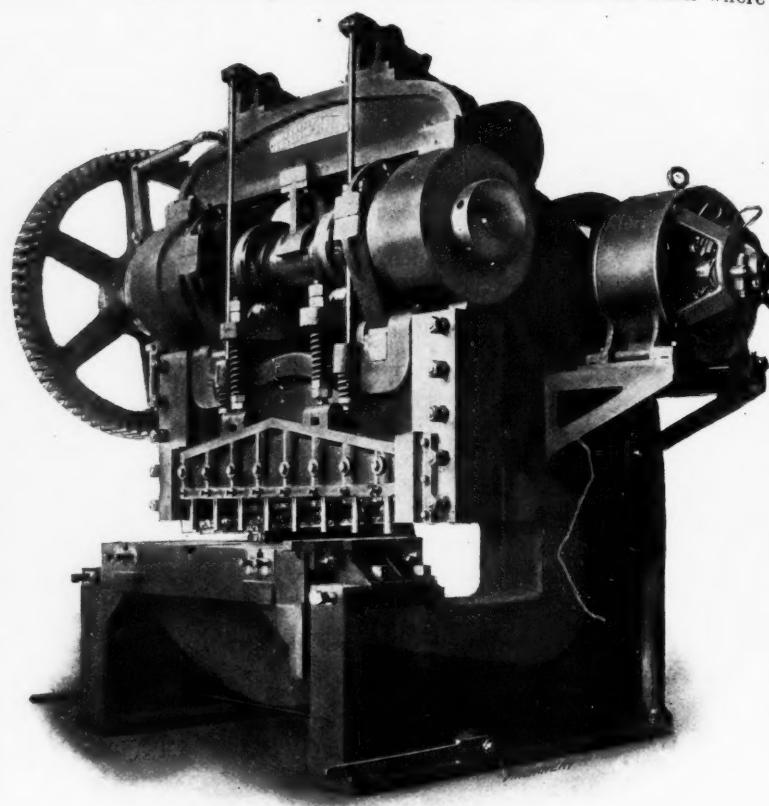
Right-hand Side of Bertsch Shear showing Application of Motor Drive
